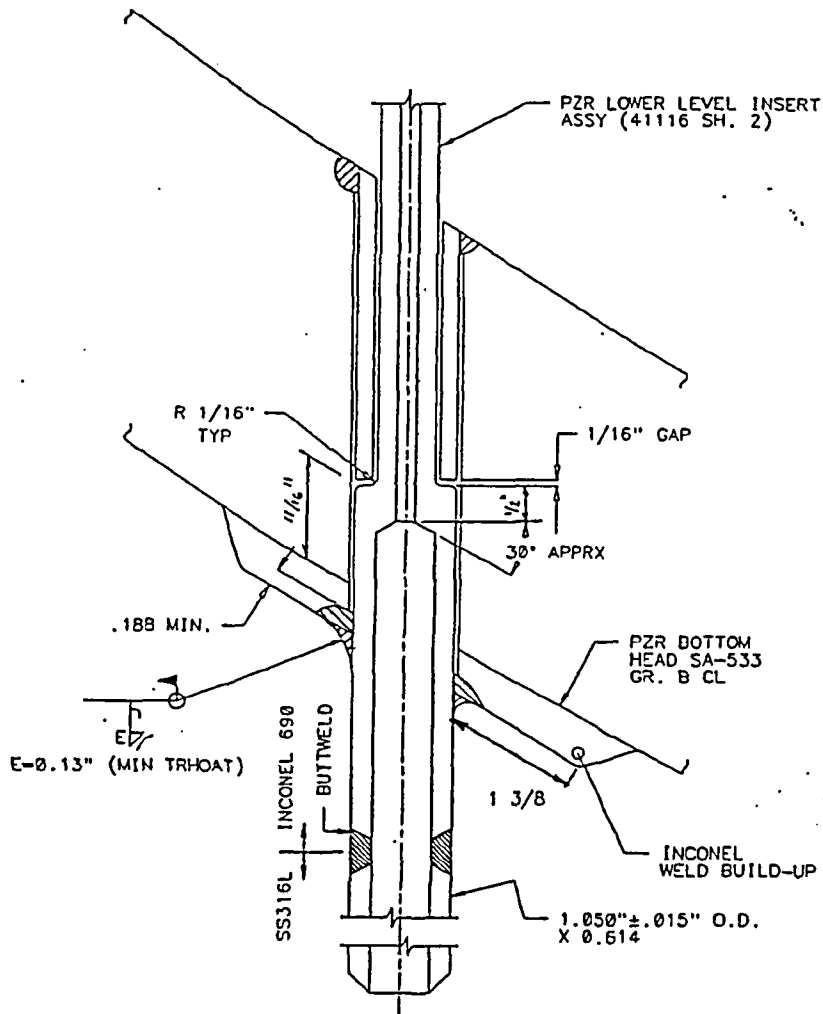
Weld Repair Geometry – Circular Shaped Pad
